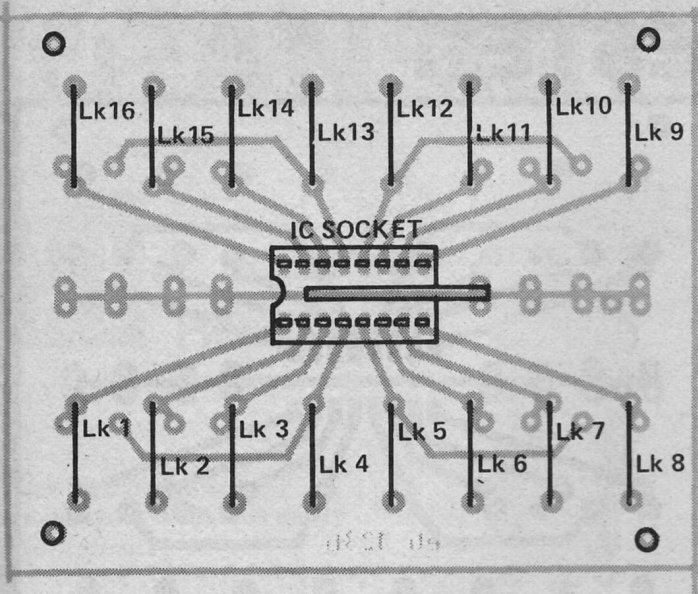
Component overlay for the test-socket board ETI-123b, non-copper side.
